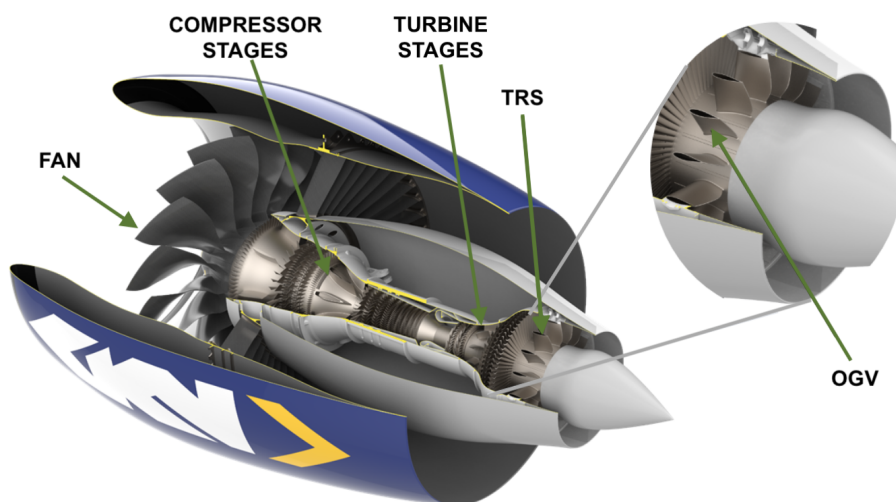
Cross-sectional view of a typical turbofan engine, showcasing its main components.
